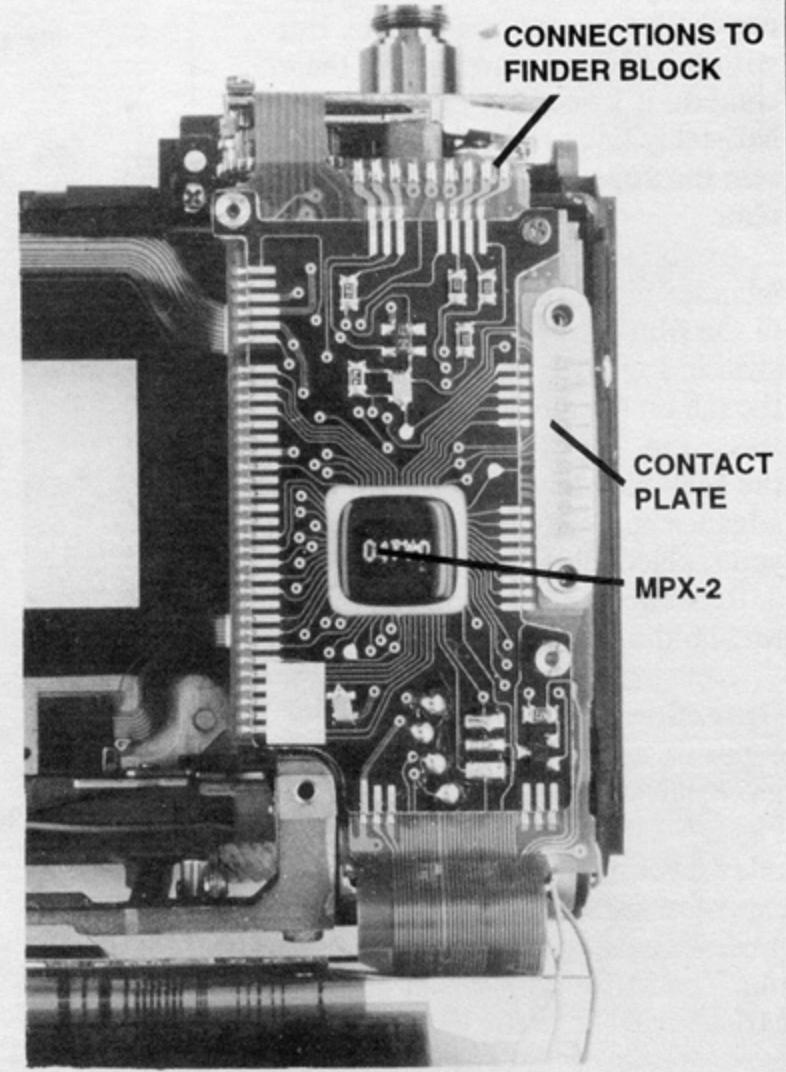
FRONT OF BODY, DISPLAY FPC REMOVED
